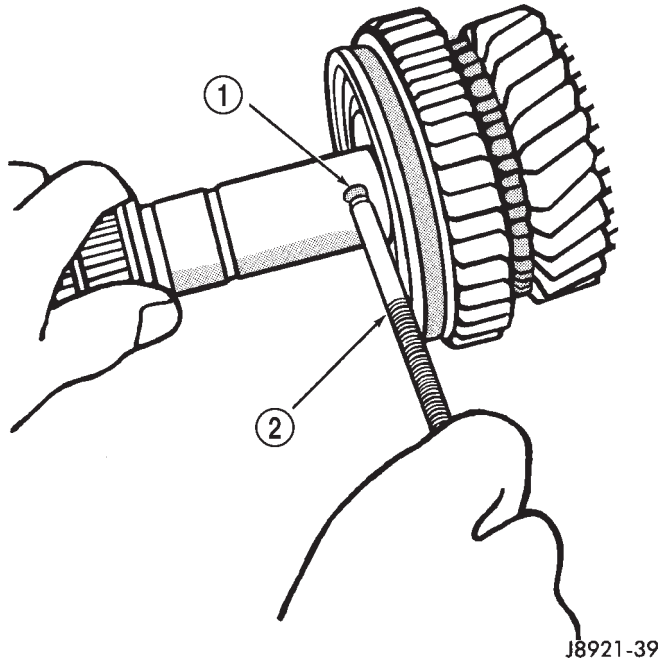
Remove First Gear Bearing Inner Race Lock Ball
